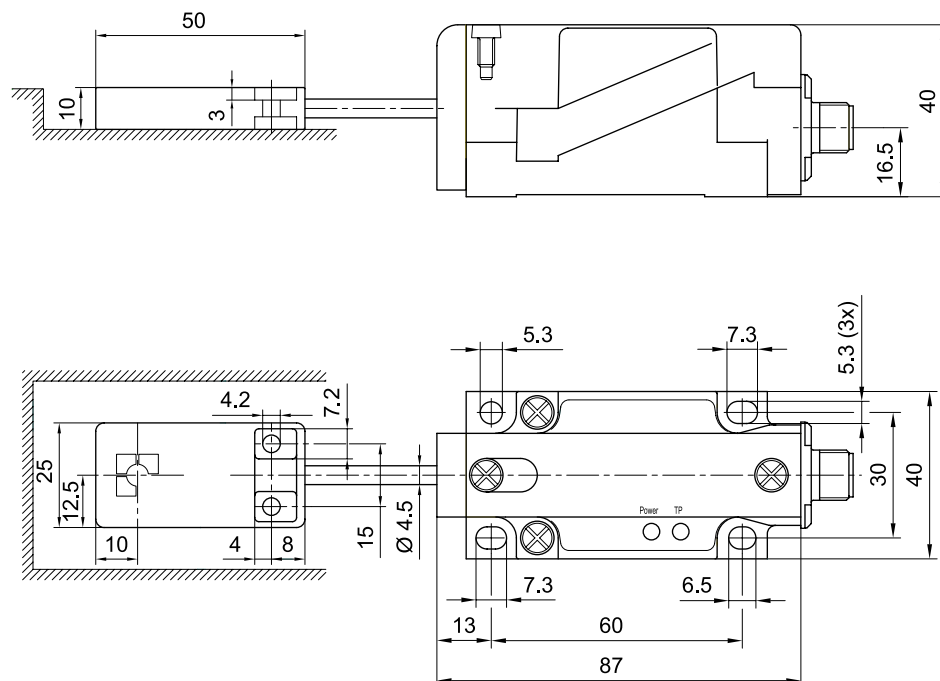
BIS L-400-043-004-02-S115 processor dimensions
